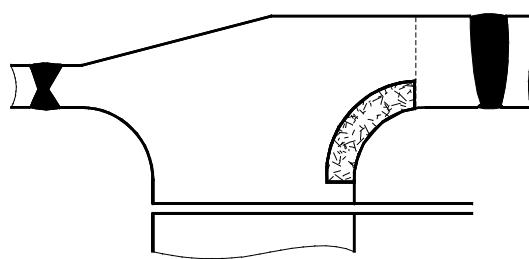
Region with defects and assumed fracture surface (dotted line)
